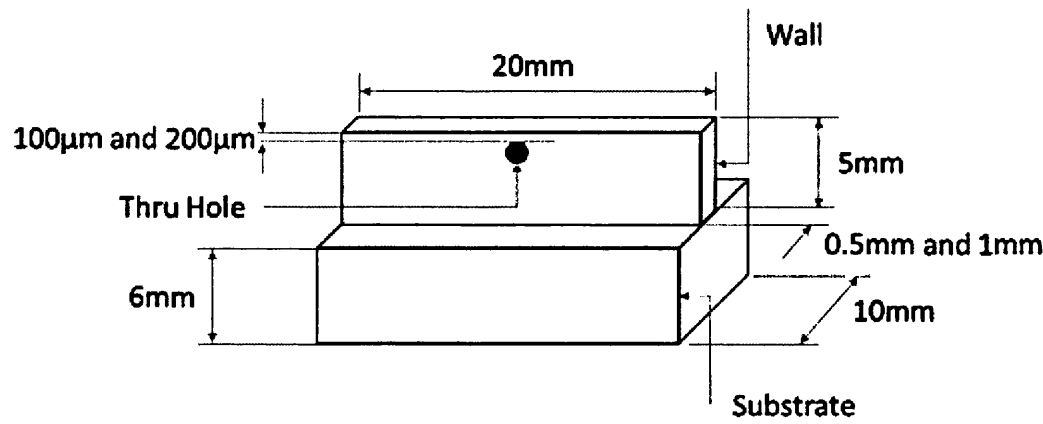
Dimensions of the manufactured test-pieces including side-drilled hole.
